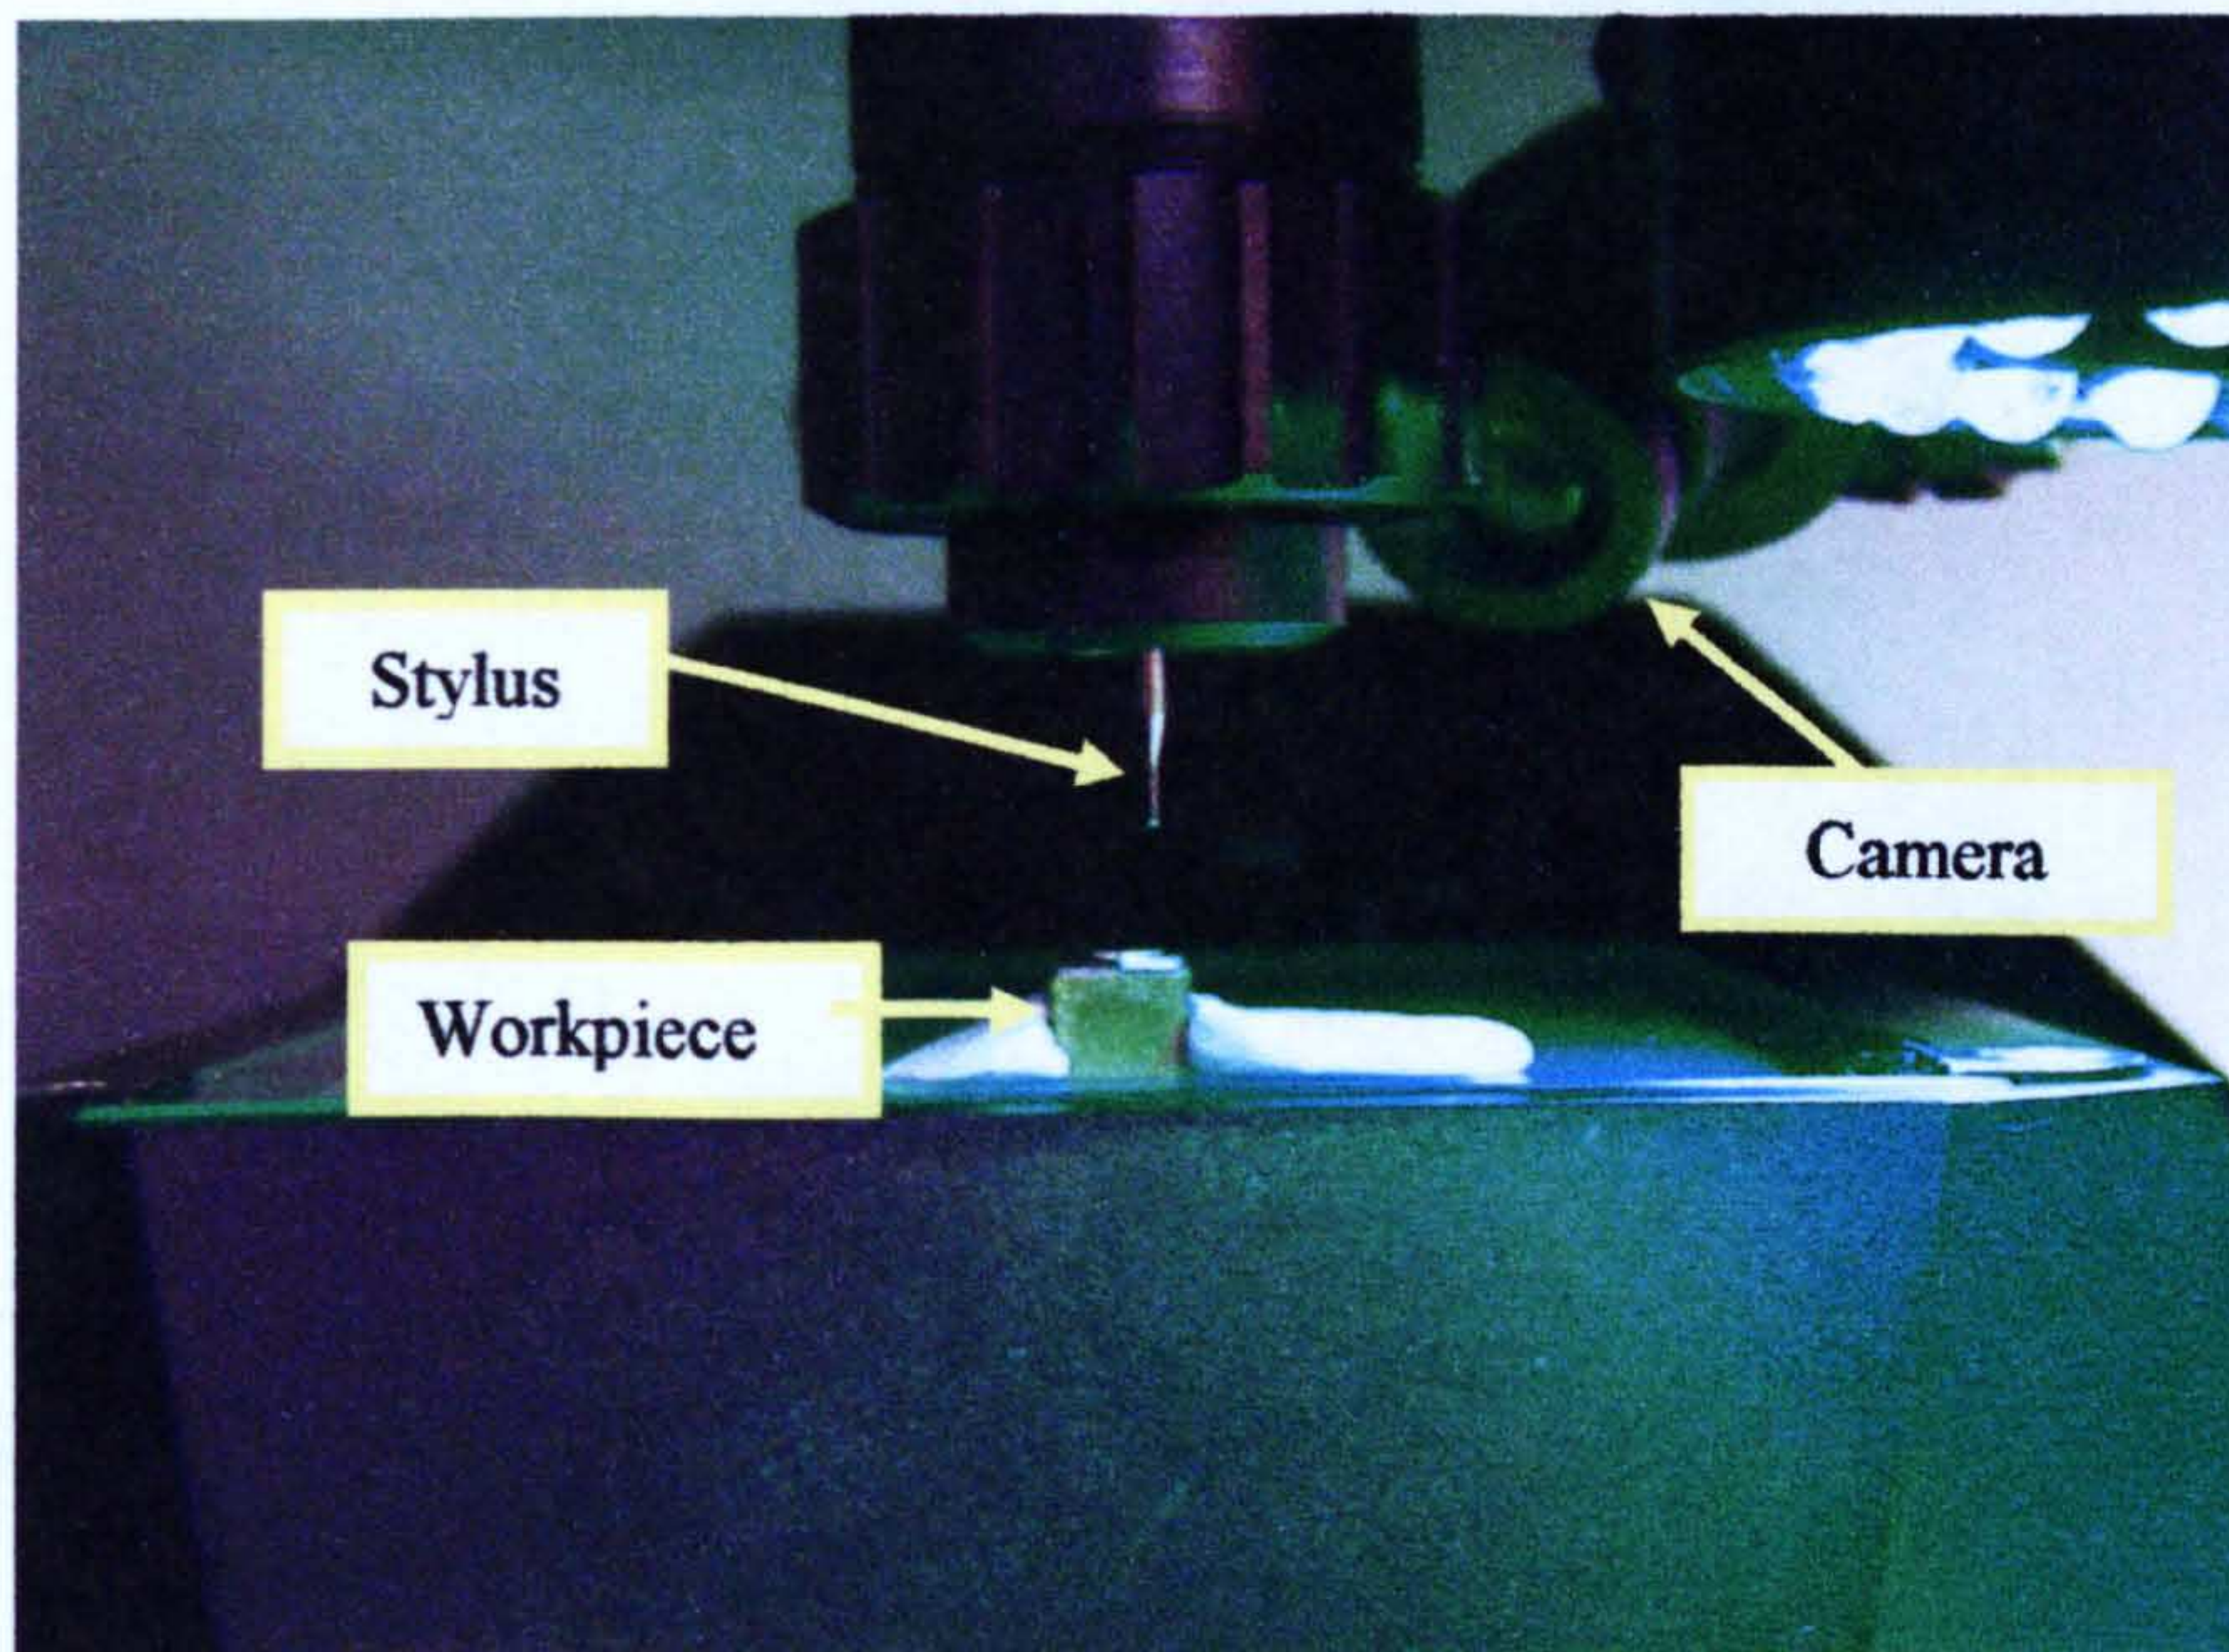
(b) AISI 1040 micro-testpiece being evaluated via CMM
